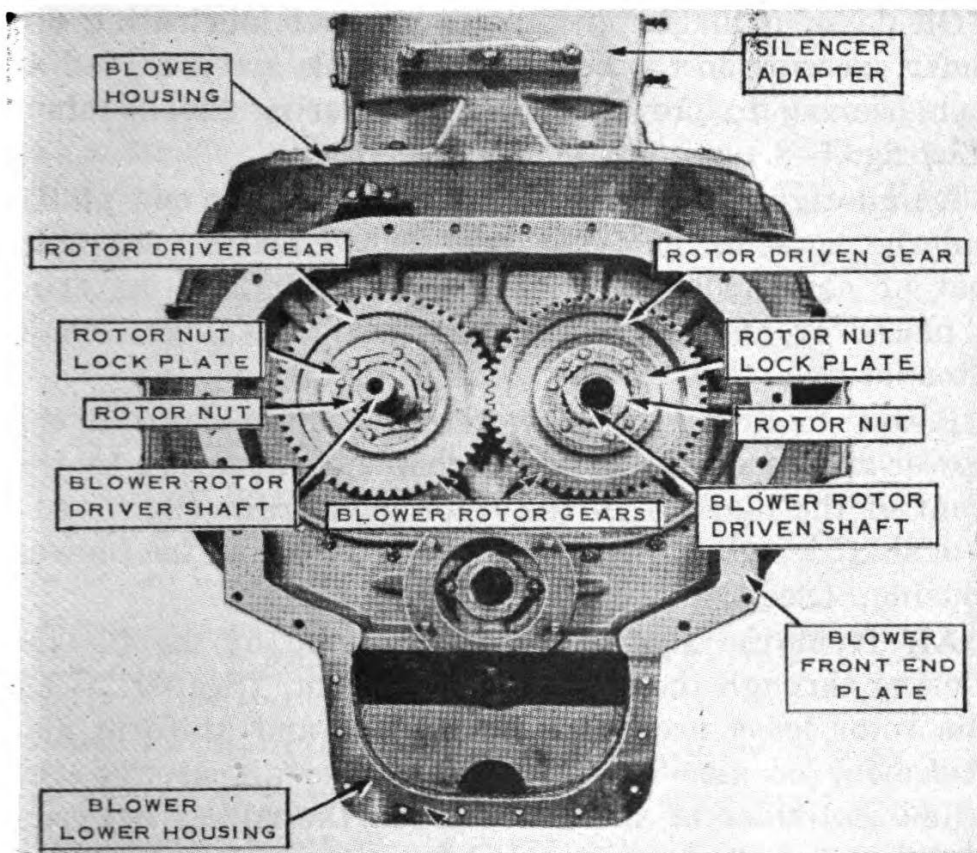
Blower rotor gear train (GM12 and 16-278A).
